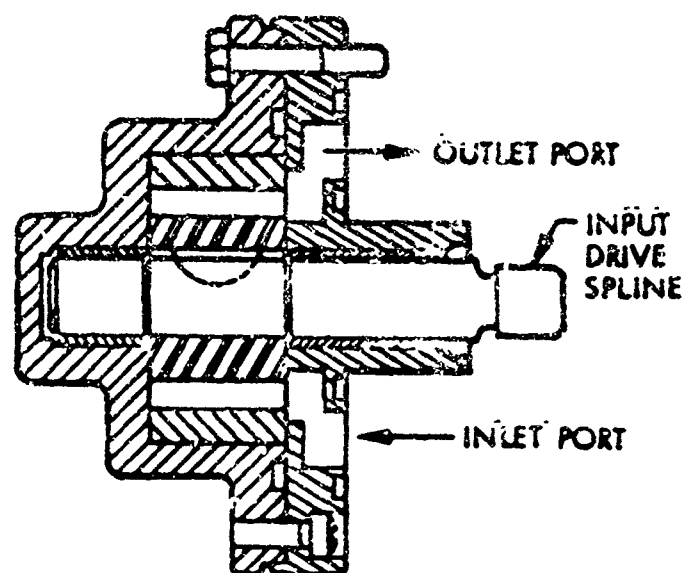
Gerotor Type Mechanical Pump - Cross Section
